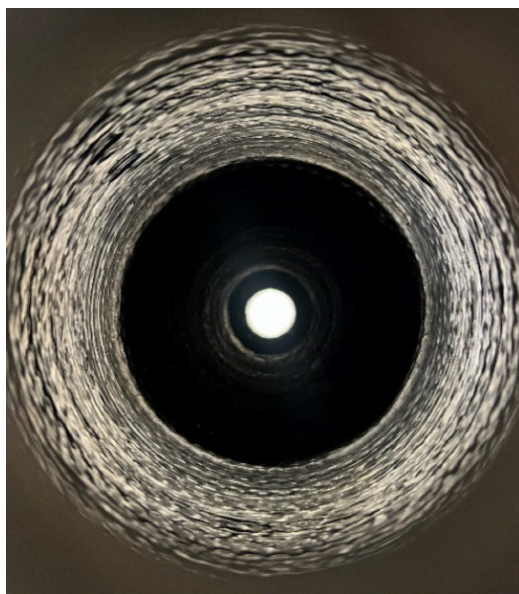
Hollow interior of carbon fiber shaft after mandrel has been washed out and internal layup materials removed.
